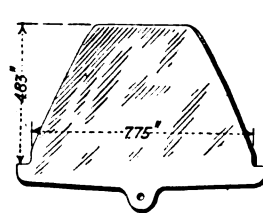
GAGE FOR INSIDE OF ADAPTER
